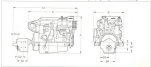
Engine with standard accessories installed including cooling and gearbox (non-rotary)
